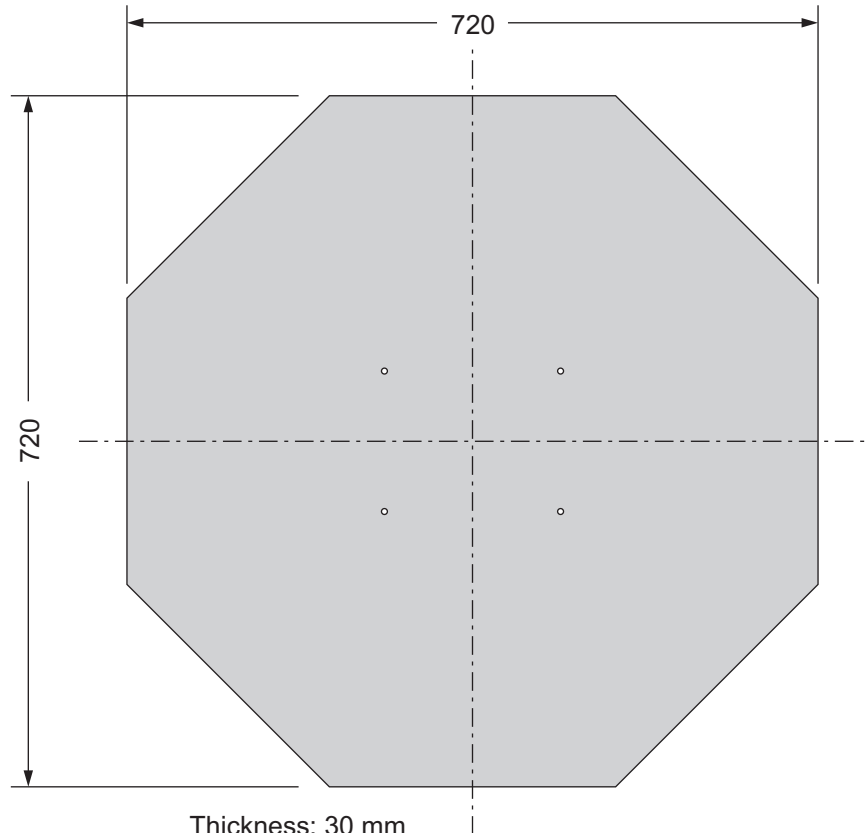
Lower grid plate of CROCUS (dimensions in mm)
